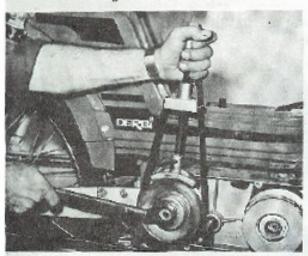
Driven pulley. Bend back tab on retaining washer. Using driven pulley holder #2 loosen and remove nut.
